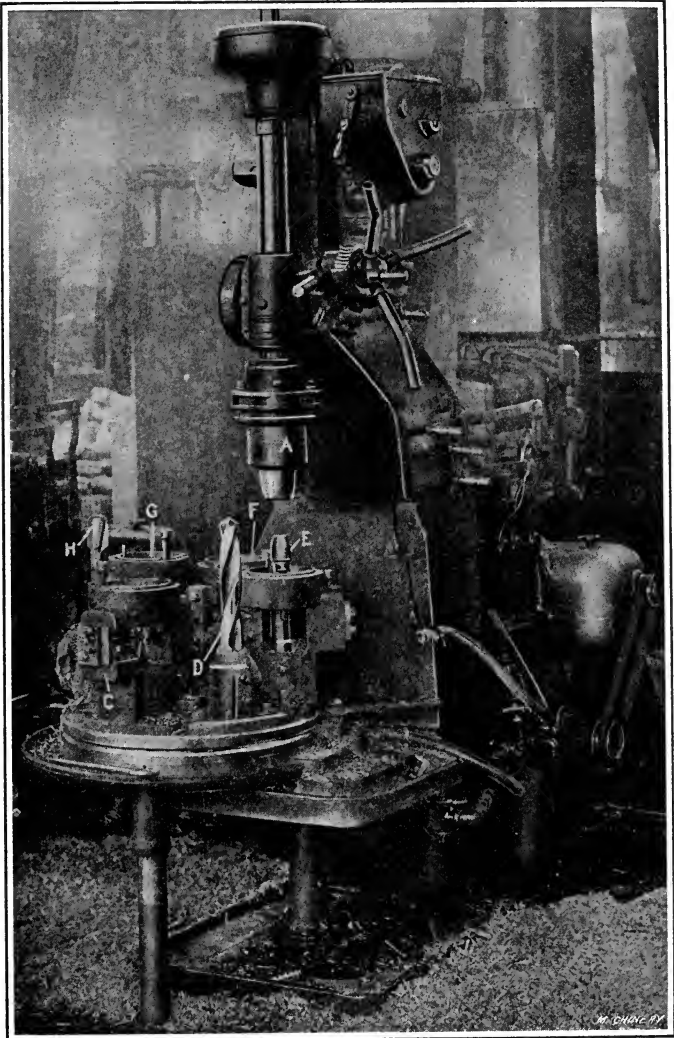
Drilling Machine machining 18-pound High-explosive Shells
